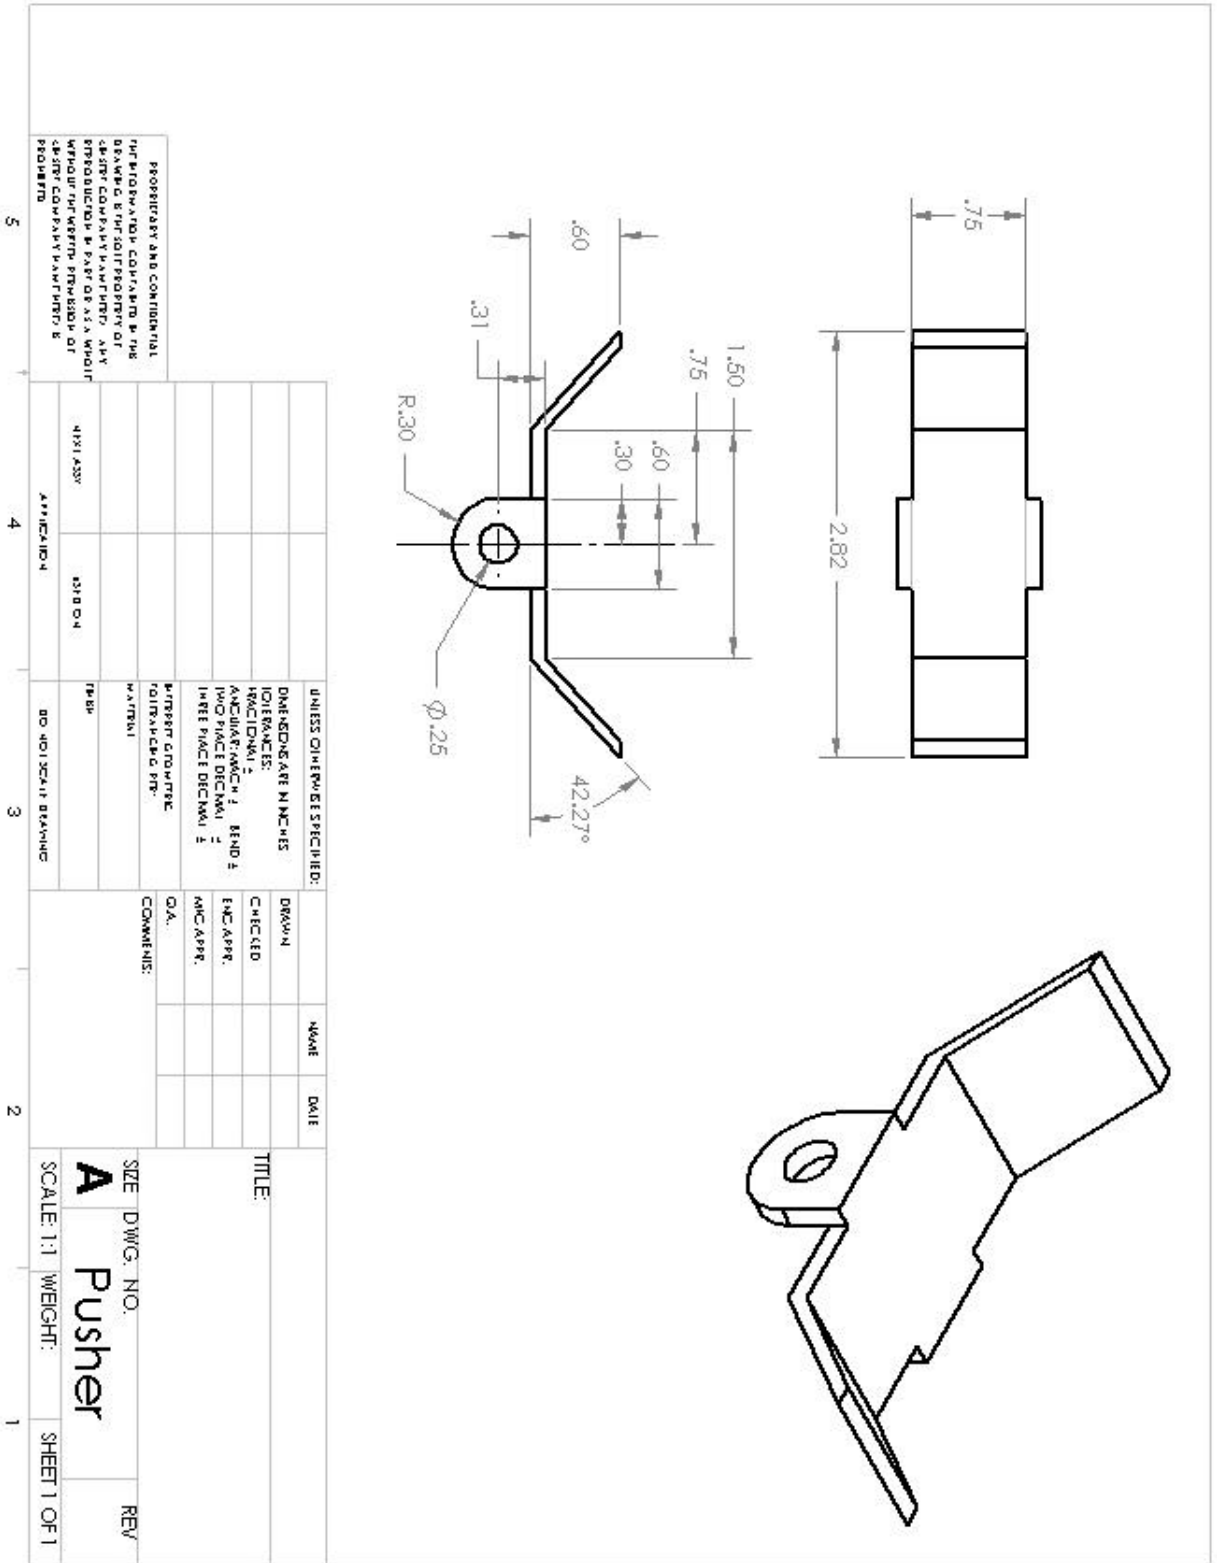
Main Pusher Piece which connects the pusher assembly to the actuator rod
